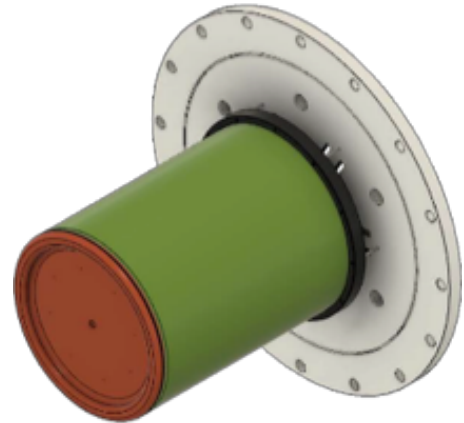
The field cage and pad plane unit, shown here as mounted on the back flange of SpecMAT.
